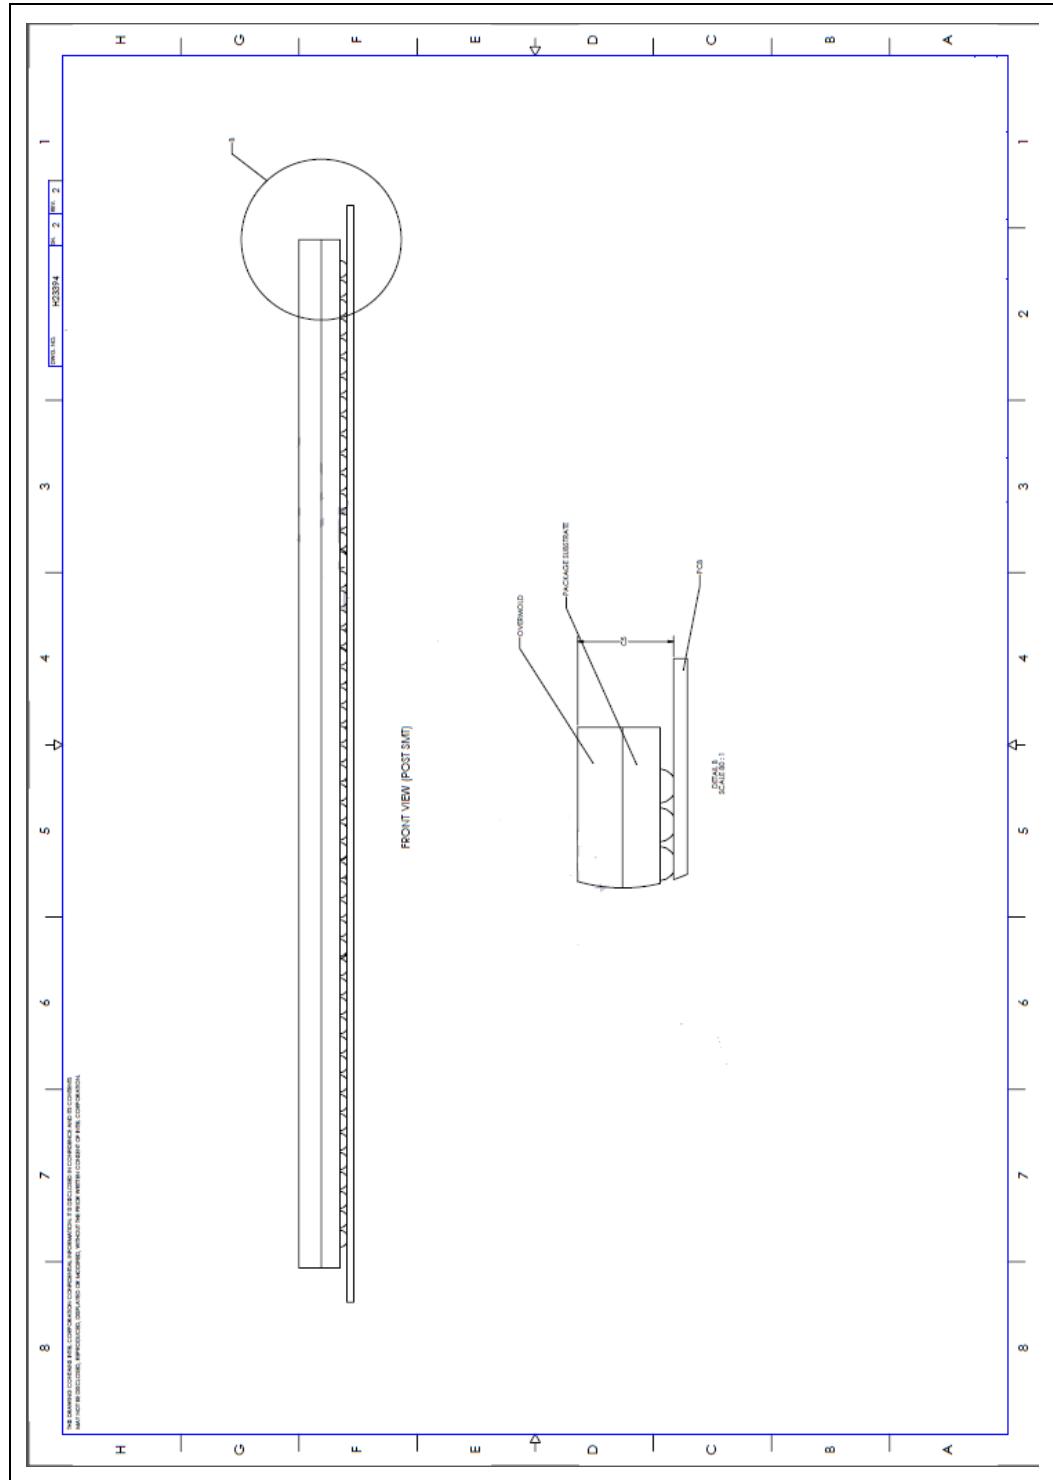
Package Mechanical Drawing for MSP-T4 (Part 2)
